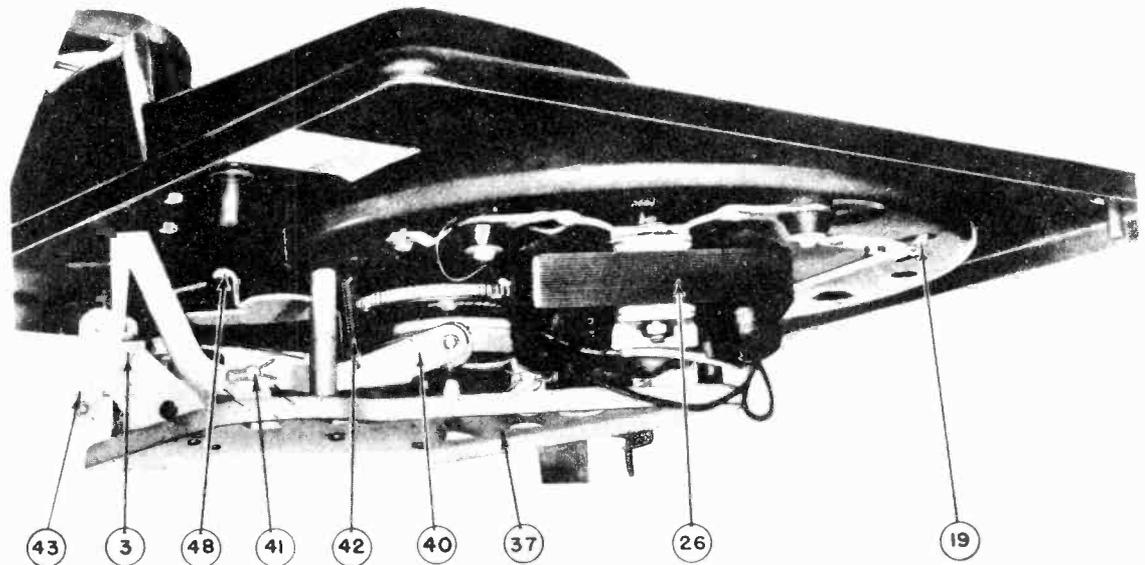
PARTS LOCATION -- LEFT SIDE VIEW
